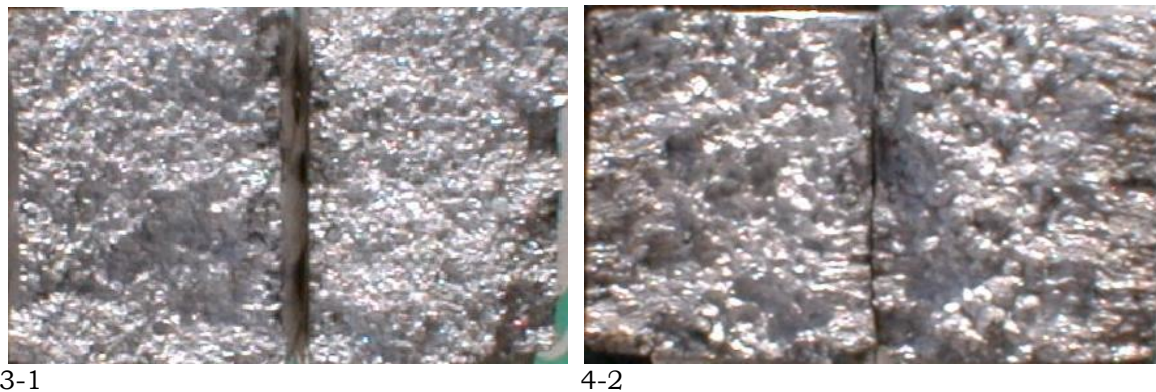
Fractography for tensile-tested dissimilar-welded joints 3-1 and 4-2.
